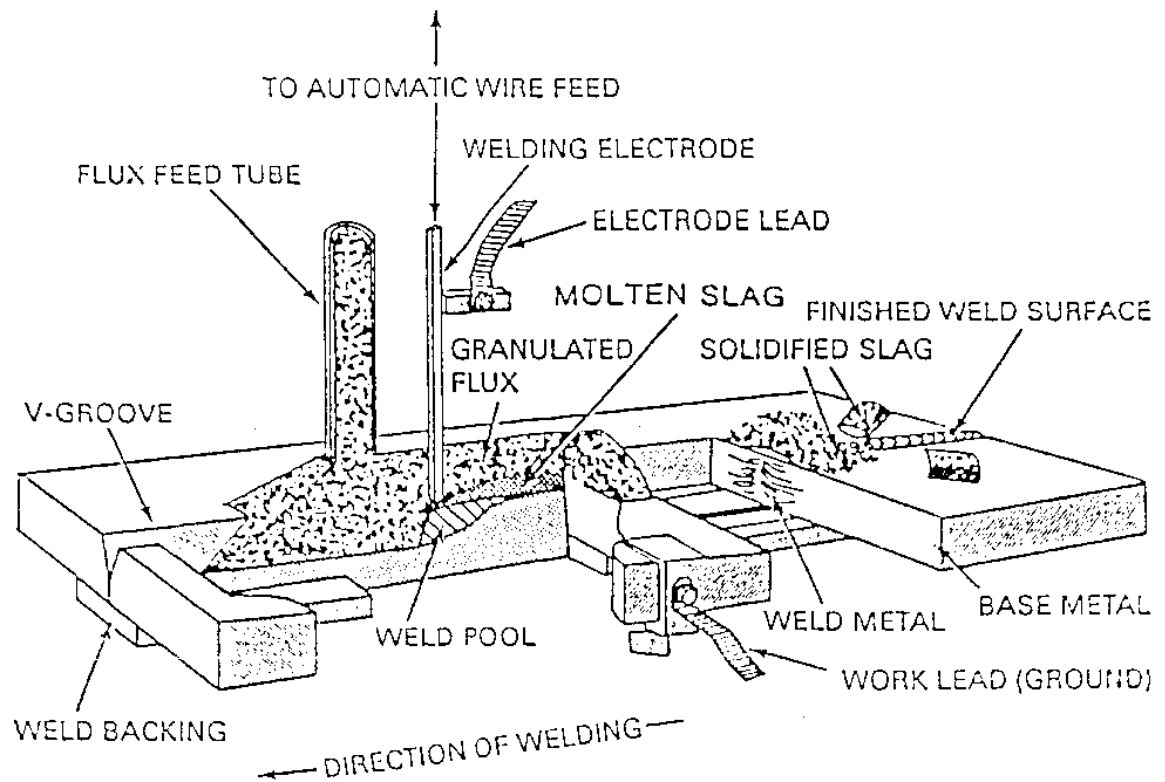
Submerged Arc Welding Process. .(60)
